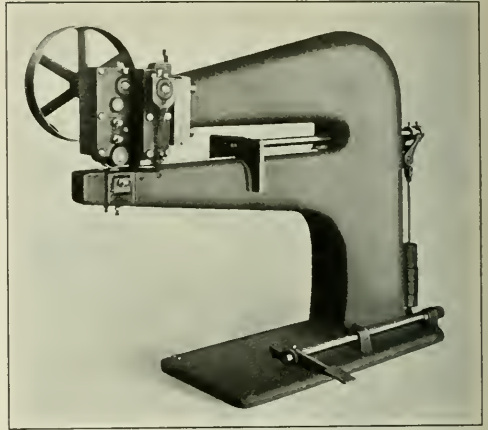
Seam-closing Machine built by Niagara Machine & Tool Works
